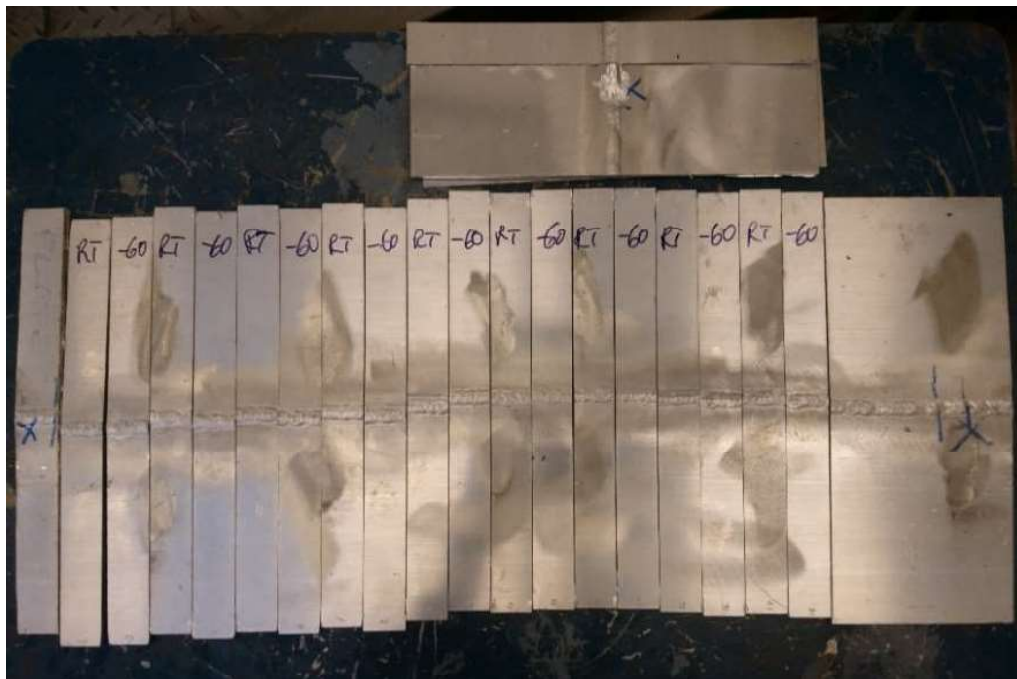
SAMPLES CAME FROM BUTT WELDED PLATES
